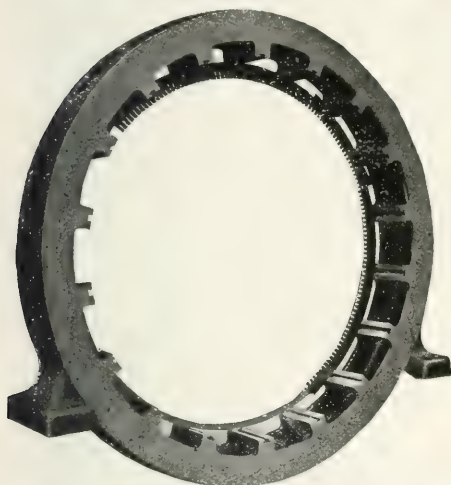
STATOR FOR ENGINE TYPE GENERATOR, WITH CORE PARTLY ASSEMBLED
